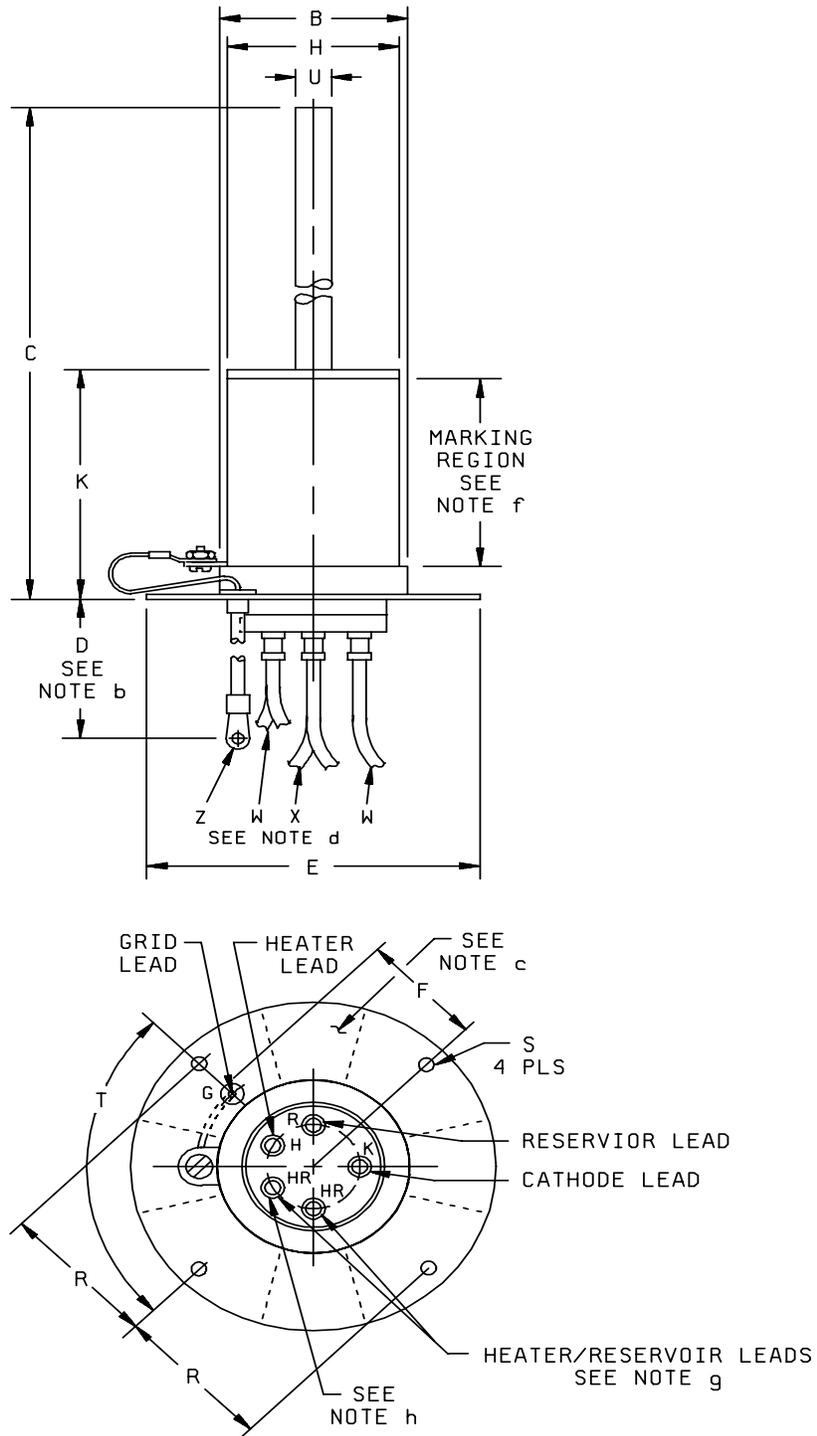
Outline drawing of electron tube type 5948B (ceramic version).
